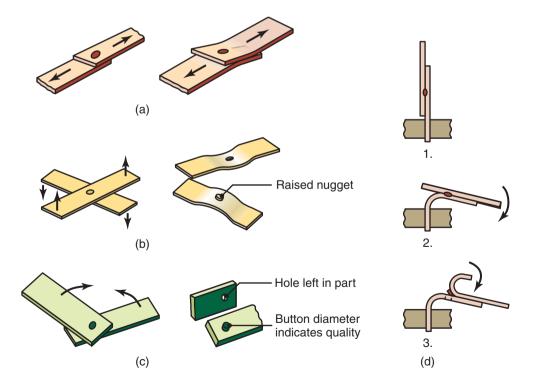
Test methods for spot welds: (a) tension-shear test, (b) cross-tension test, (c) twist test, (d) peel test (see also Fig. 32.9).
